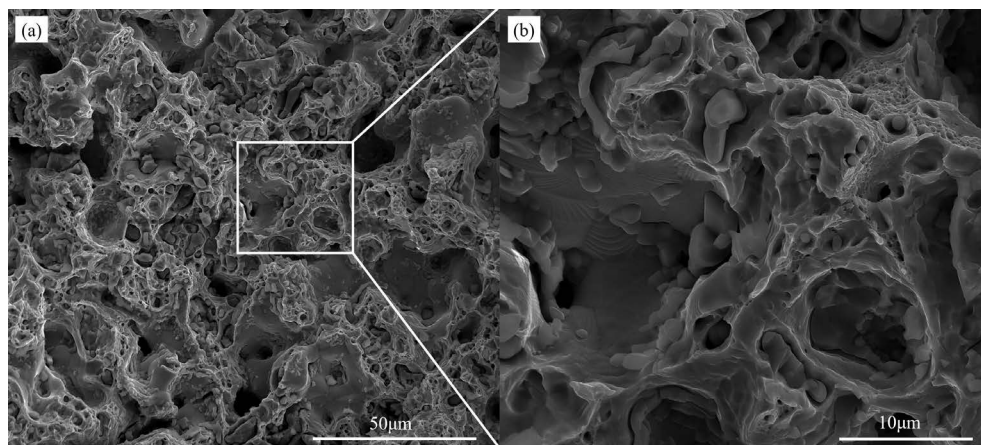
Tensile fracture morphology of sintered alloy with component C-0.4 Fe_2O_3
